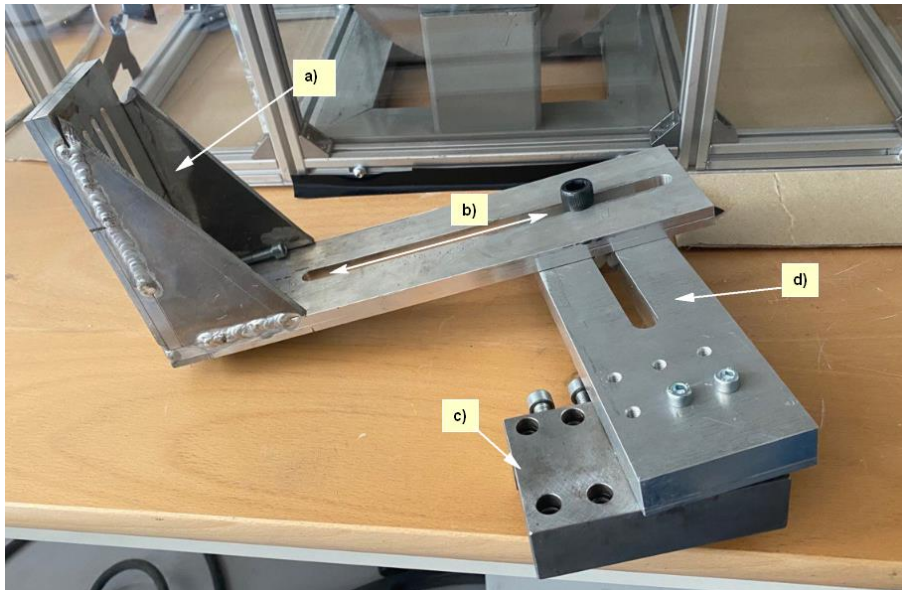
Holder for the HF turning induction coil. a) Is attached to the SMT tool holder, for the movement along with the tool. b) Hole is made to control the distance of the coil to the workpiece. c) Coil fixturing, also possible to control the distance to the workpiece. d) Gives possibility to control distance of the coil in axial direction.
